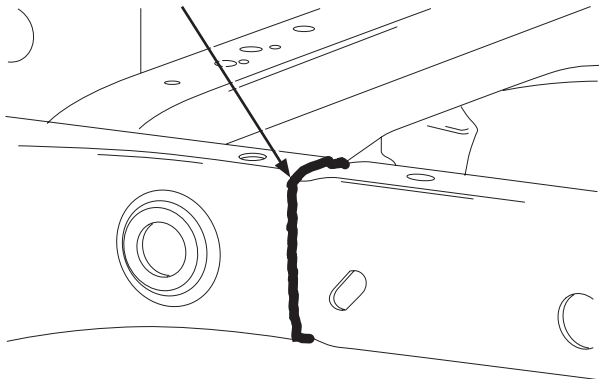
LEFT SIDE VIEW – DISASSEMBLED
